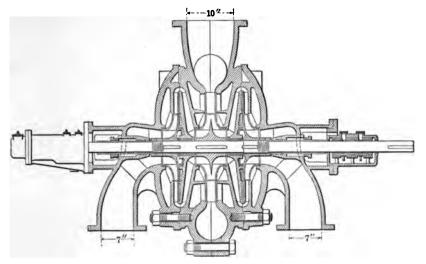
Plan of Boiler-feed Pump with Opposed Balanced Impellers.
